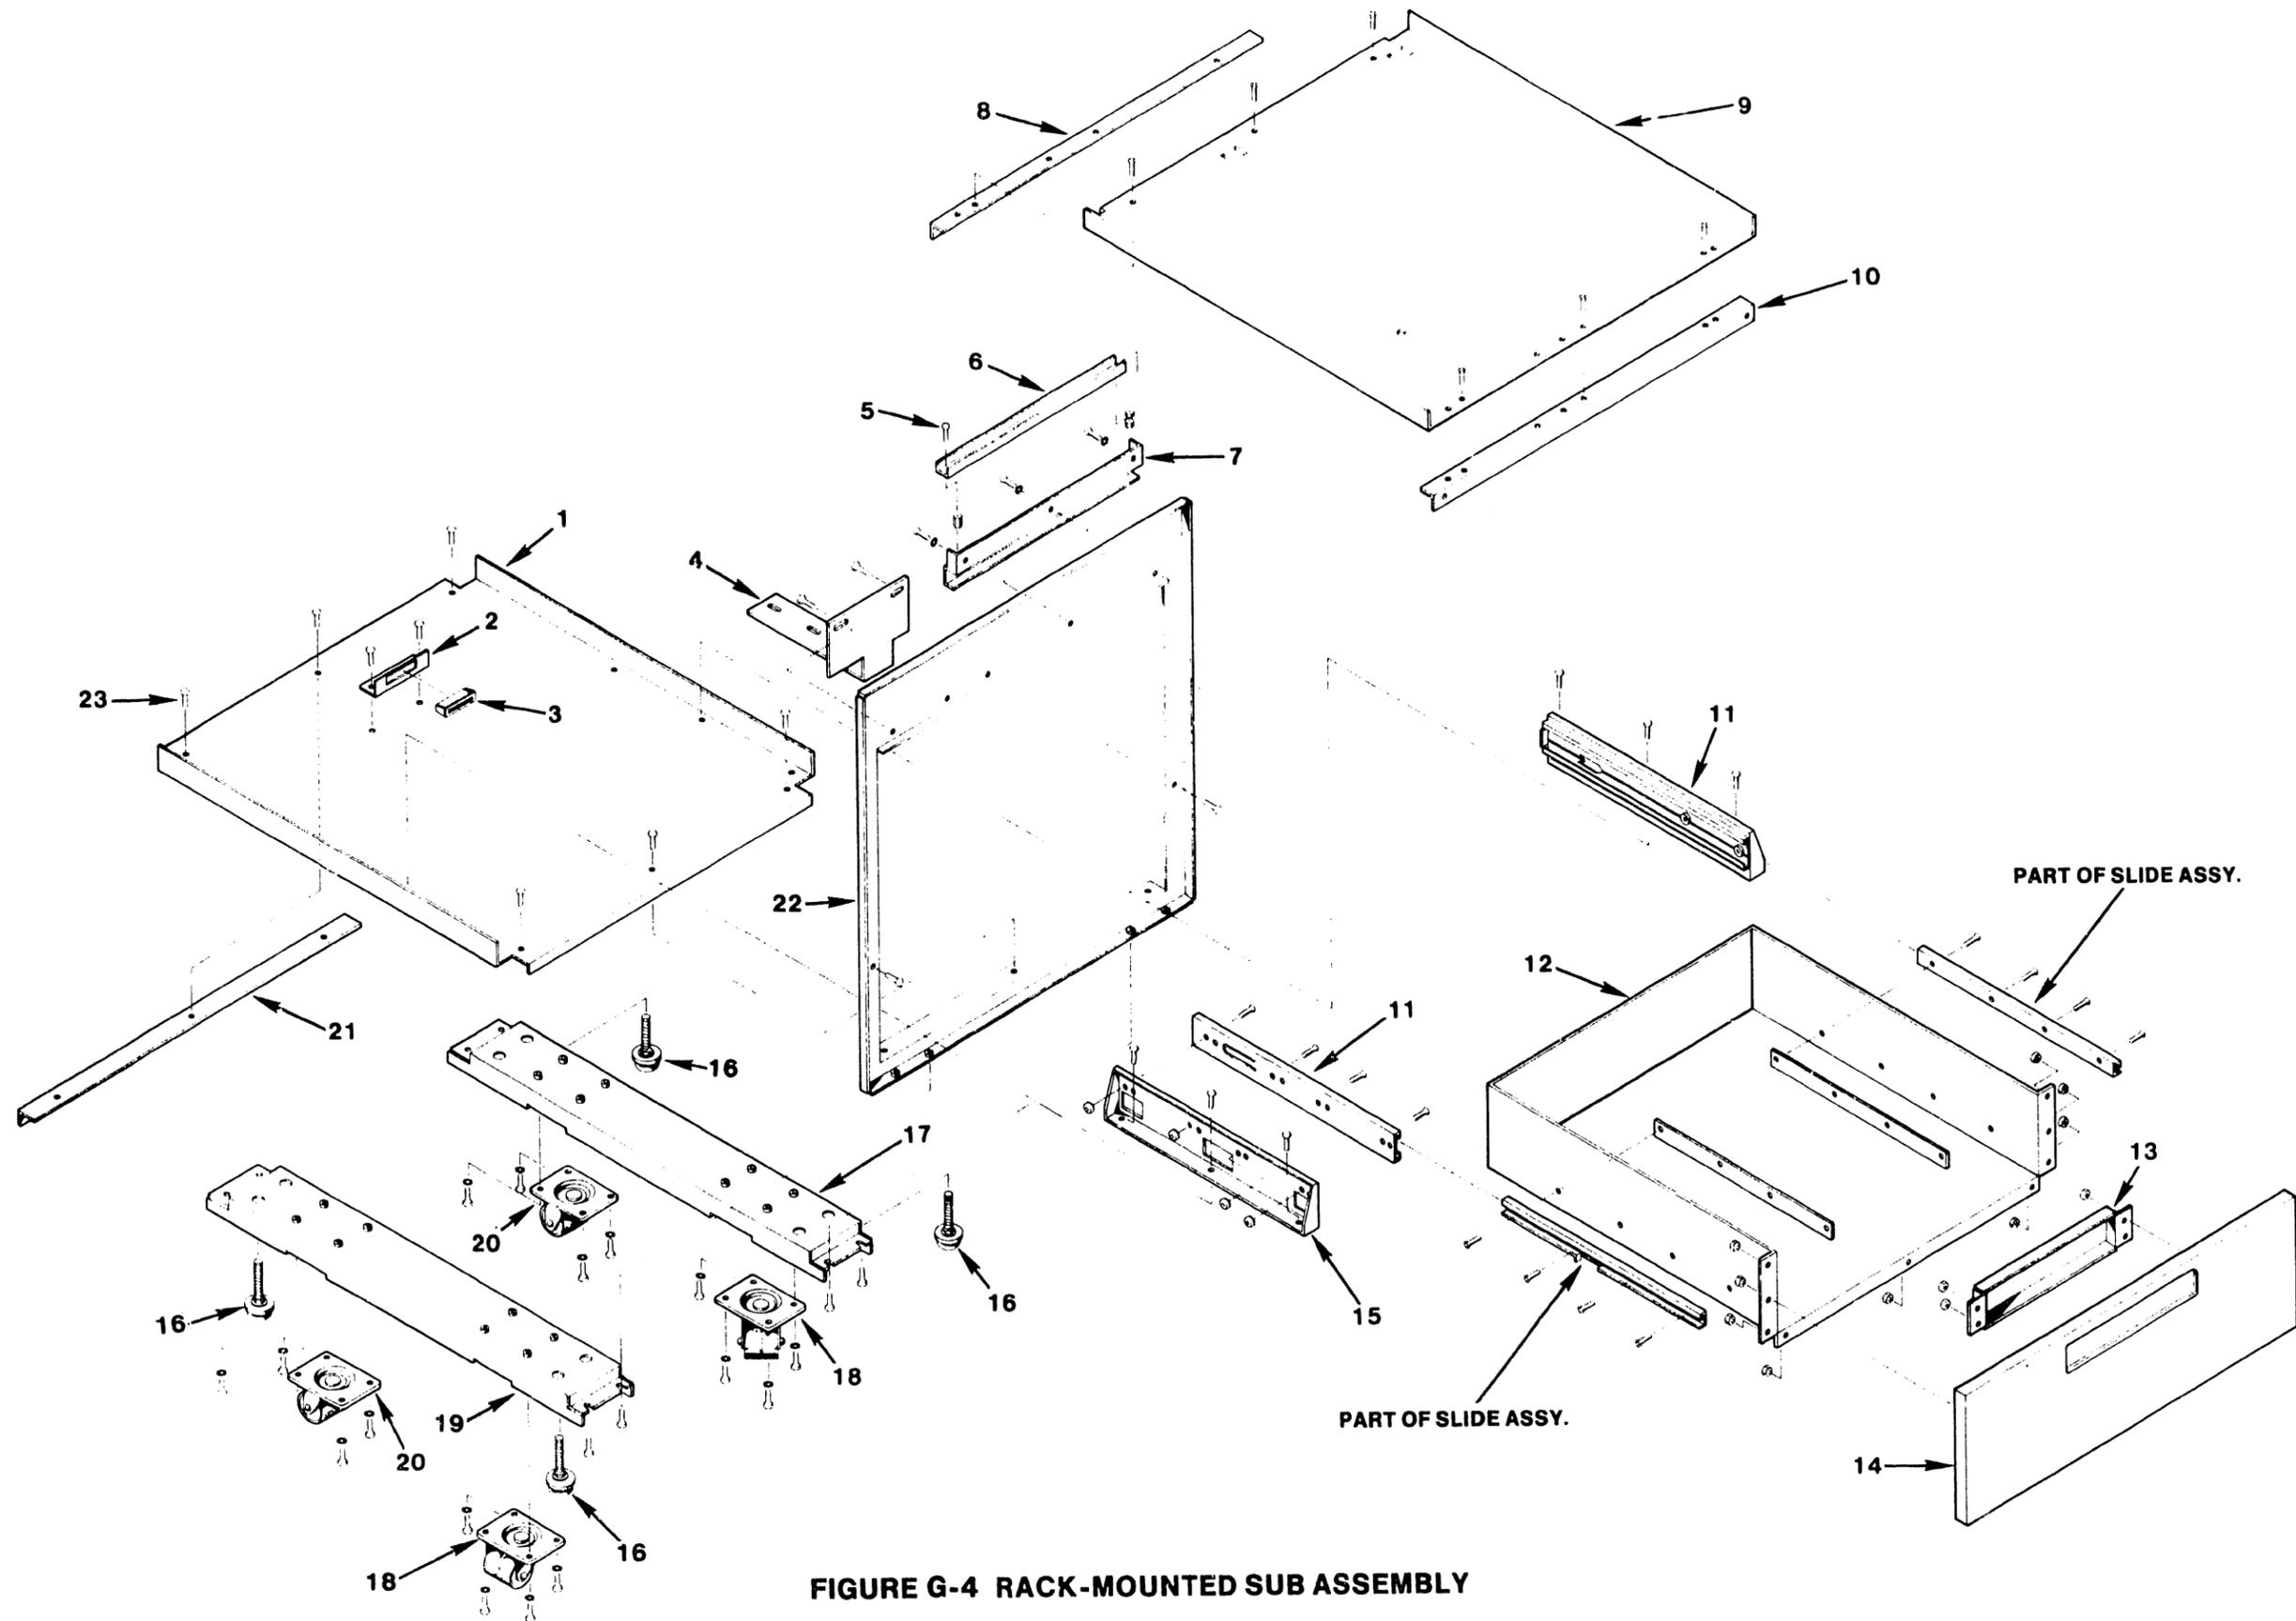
RACK-MOUNTED SUB ASSEMBLY
